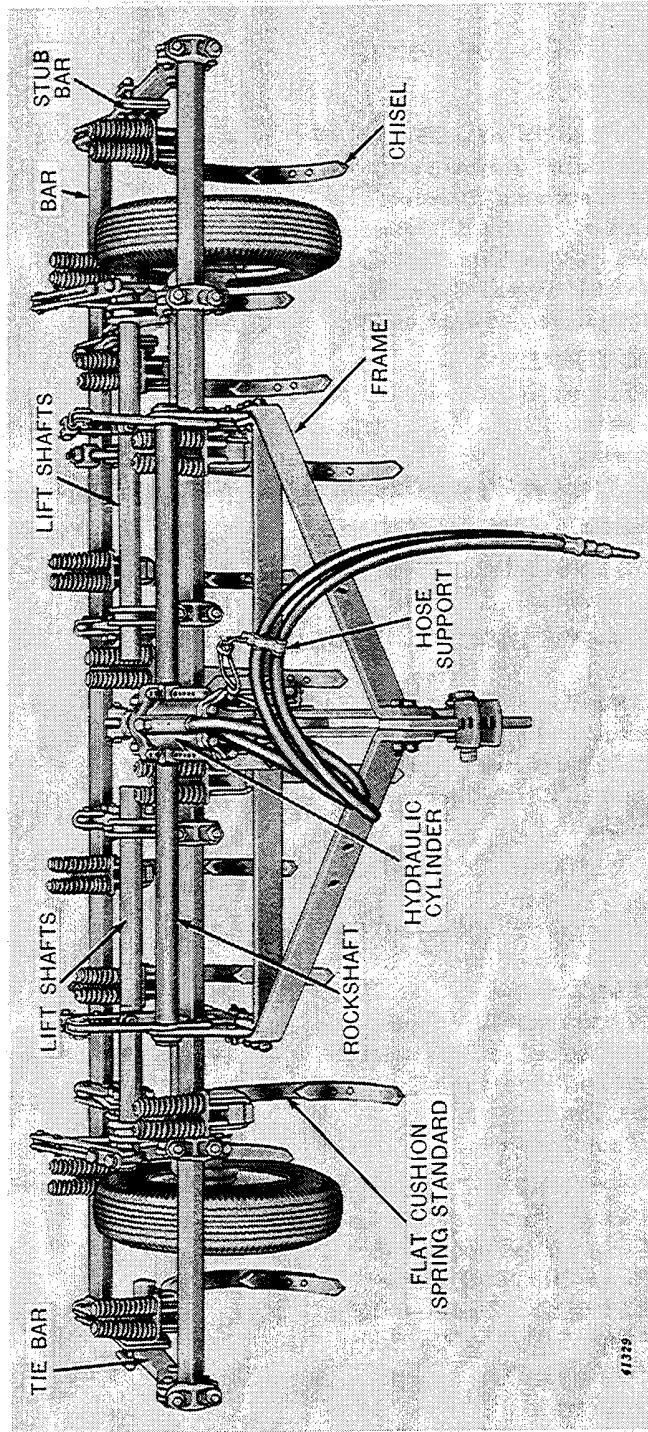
No. 652H—12-Foot Power-Trol Tool Carrier with TE-6 Equipment
